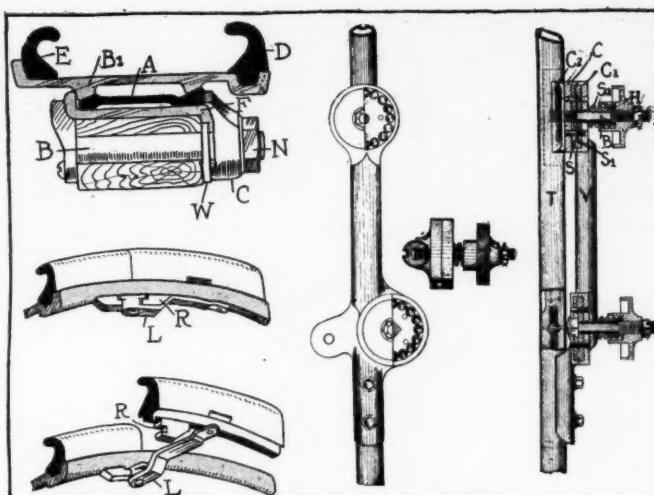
Standard Q. D. and Stanweld demountable rims. Fig. 4—Section of Ansonia windshield hinge
